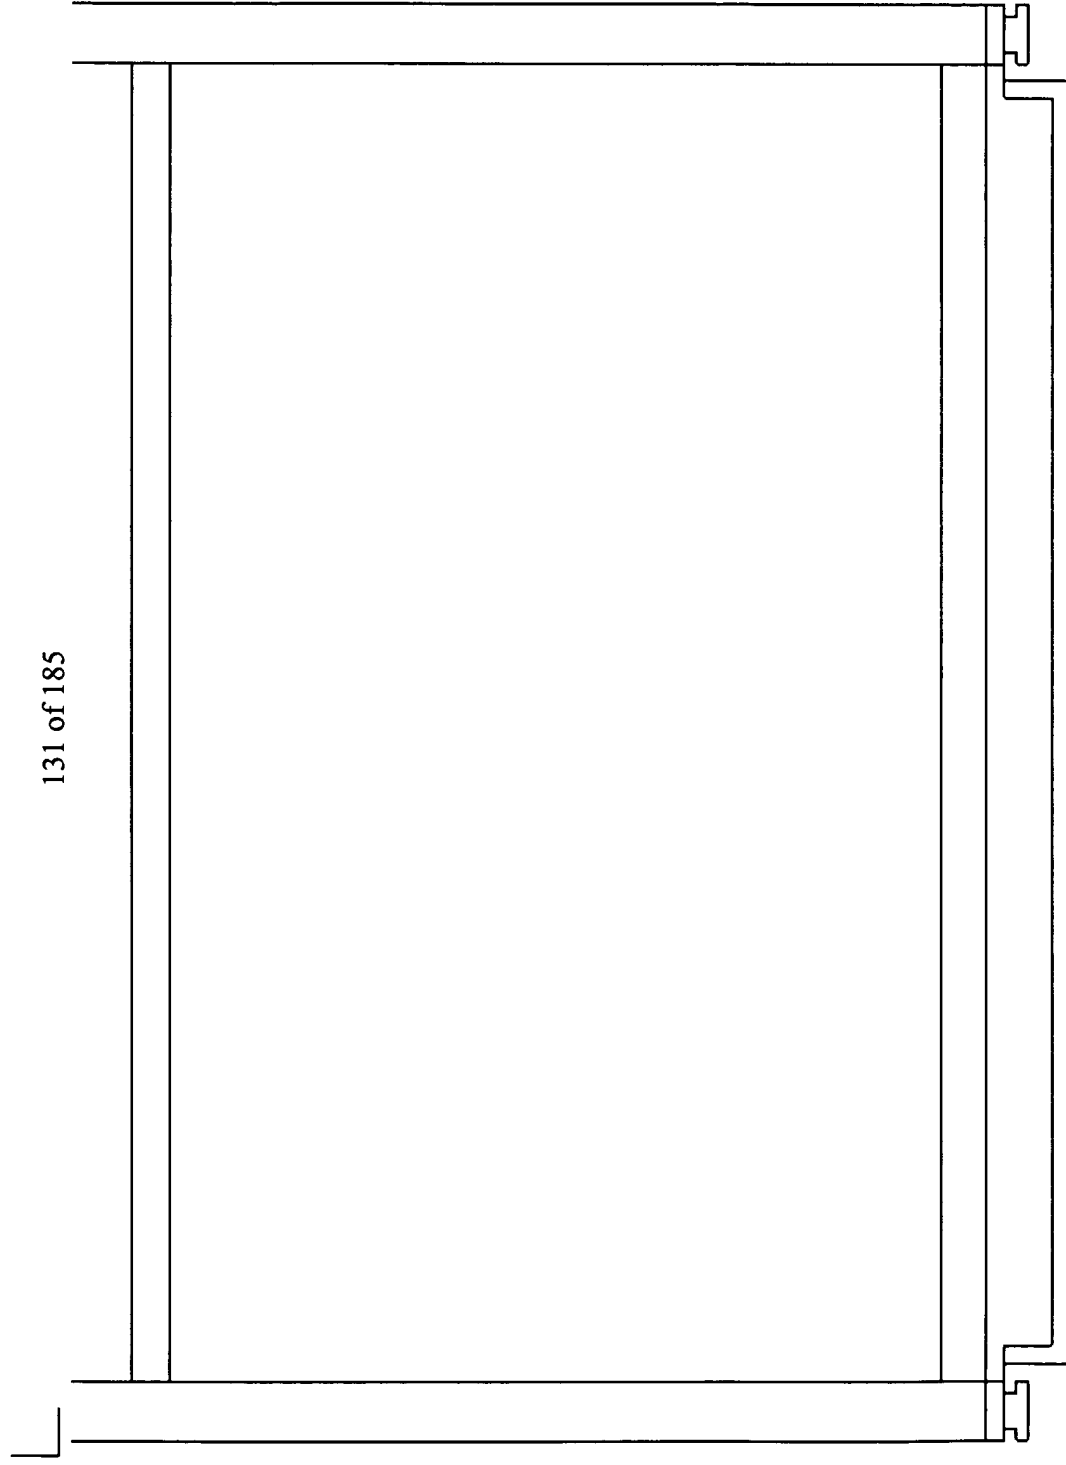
D: Top view of the right end of a ceiling frame (20 foot high cube collapsible cargo container)
